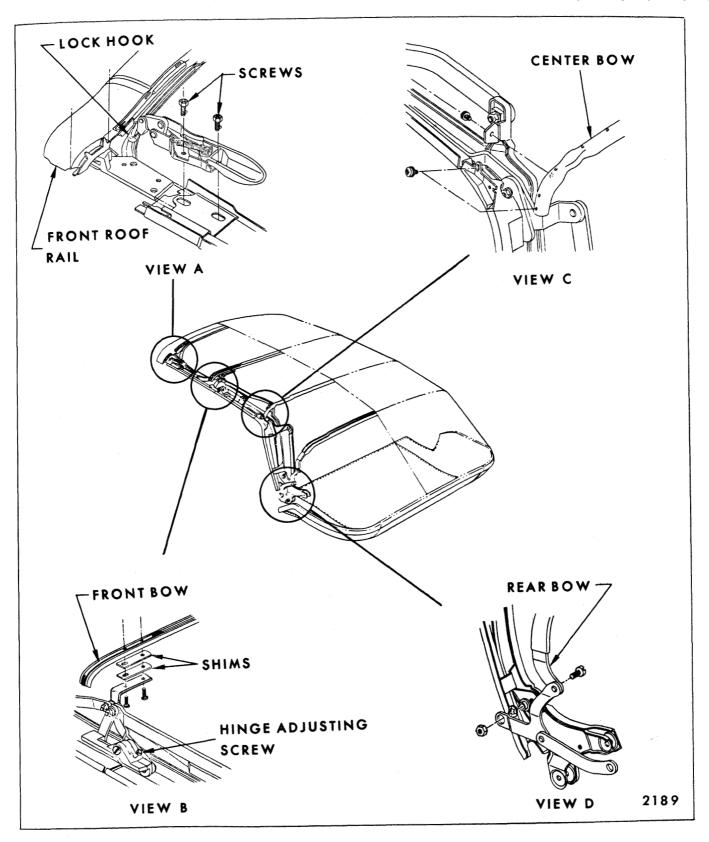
''B and C'' Body Folding Top Adjustments
